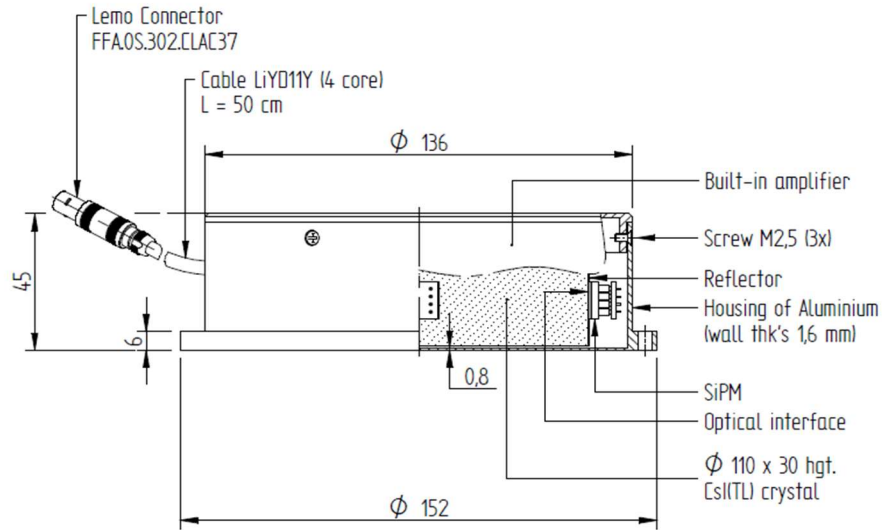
Technical drawing of the fixed-wing CsI detector made by Scionix Holland B.V. (mm when no unit is given).
